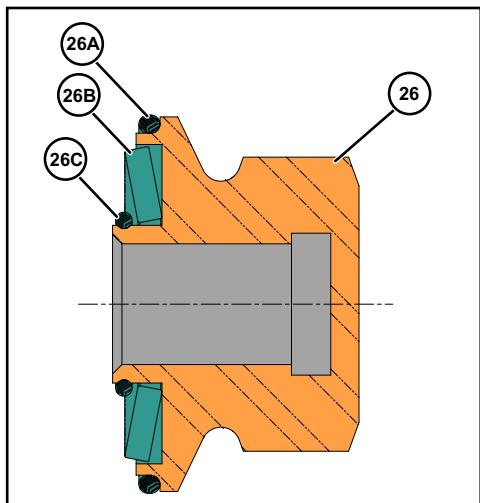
Cross-Section View of Rotor Nut Assembly, as Assembled
